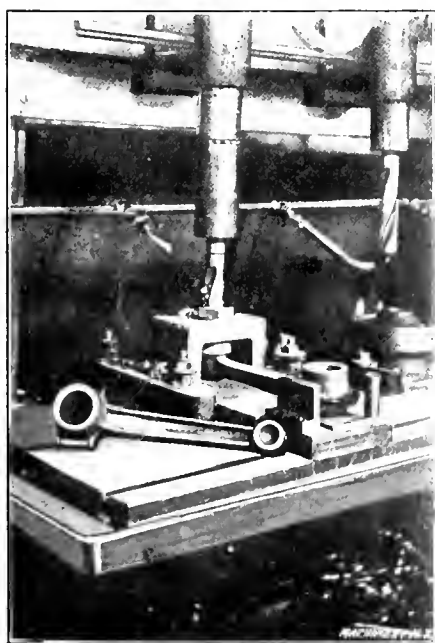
Drilling Wrist pin End of Connecting rod Forging
